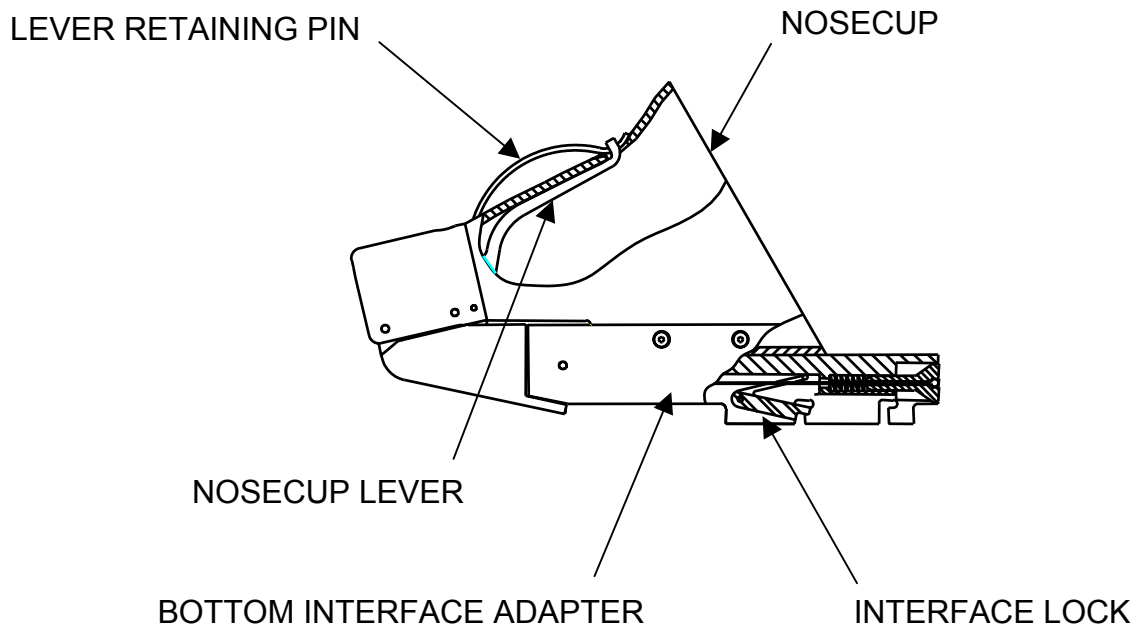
MK 87 MOD 0 Bottom Marker (Exploded View)
